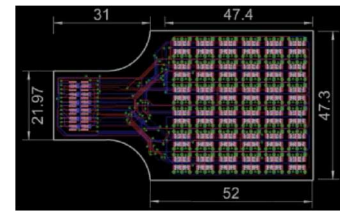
Sensor patch PCB (the dimensions are expressed in millimeters).
